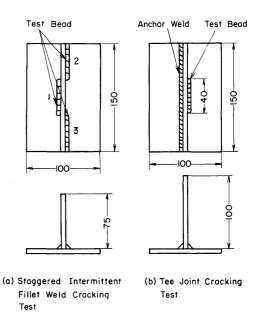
Tee Joint Weld Cracking Specimen.
